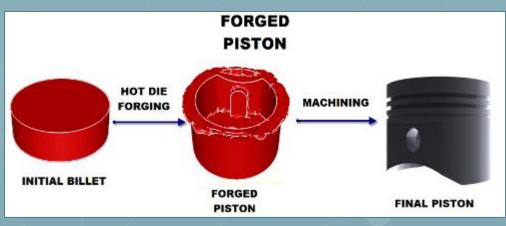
Manufacturing method of typical piston [3]. Engine Pistons Manufacturing method, Retrieved October 10, 2019, from http://msvsdei.vlabs.ac.in/upsetting_process.php
